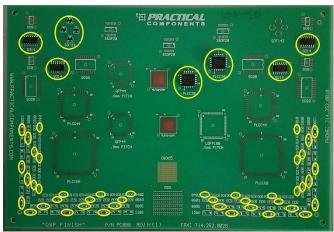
Component Placements and Spacings on the PCB008 Test Circuit Board
